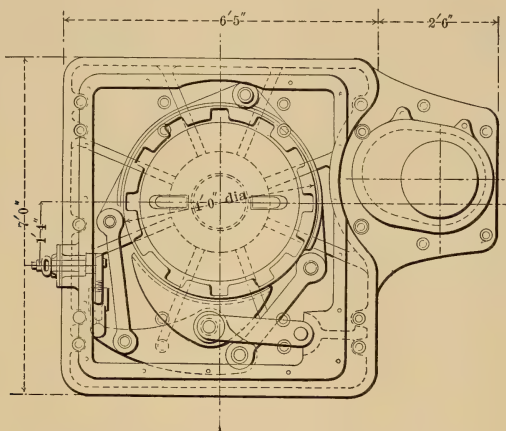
PLAN OF WINDLASS SHOWN IN FIG. 26.
